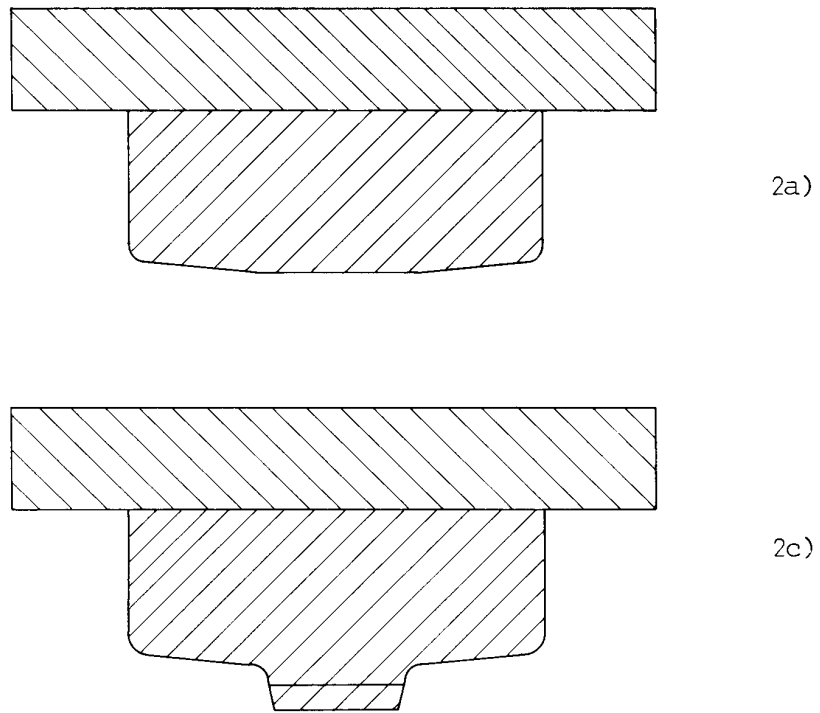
Deep-drawing tools used by Siemens¹⁹⁾ (Table V)
